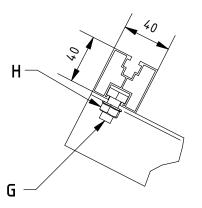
Transverse aluminum rail (F, F1) installation (joining rails to inclined beam)
